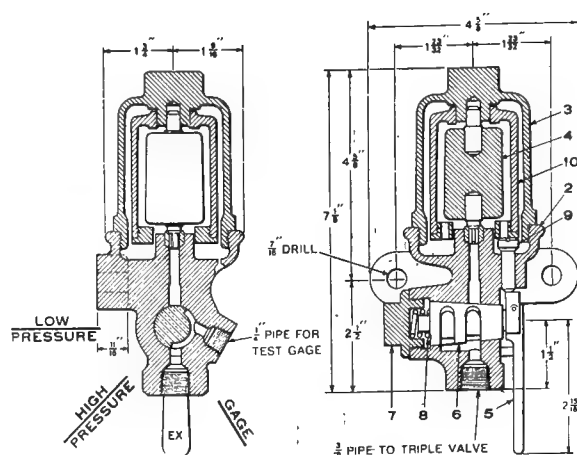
Weight Type High and Low Pressure Retaining Valve.
